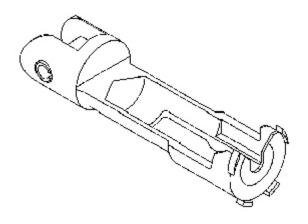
Adapter 8216-A Courtesy of CHRYSLER LLC
